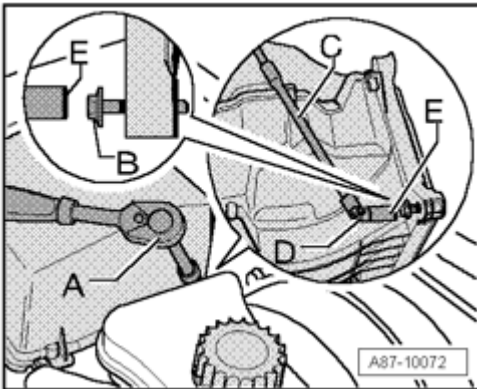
Identifying Bolt, Ratchet, Extensions, Universal Joint, And Socket Attachment
